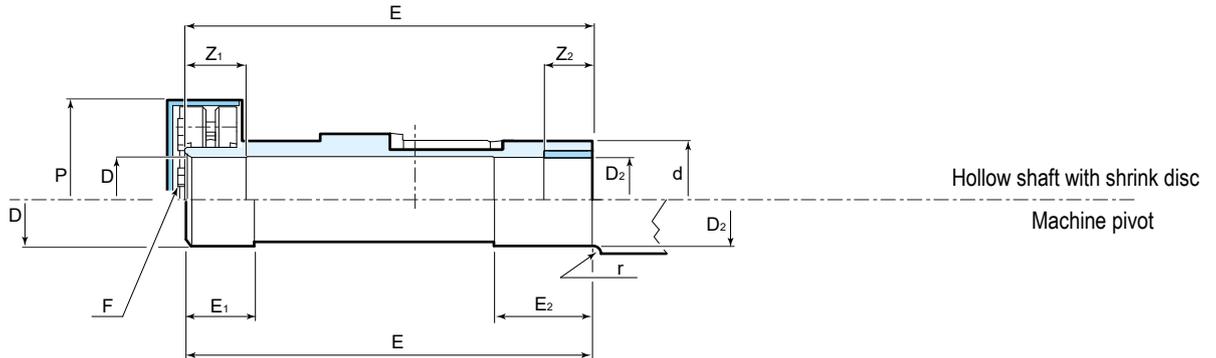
Hollow low speed shaft and machine pivot with shrink disc
